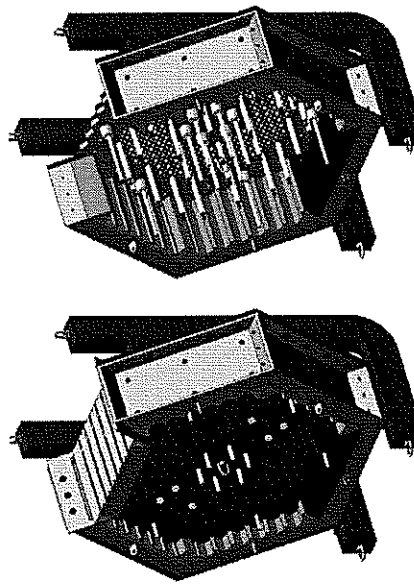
RENDER OF THE CORE MOLD SHOWN IN THE "415265 CORE BLOCK #1-5" CONFIGURATION: FULL ASSEMBLY (LEFT) AND WITH THE FRONT PLATE, TOP AND CAP REMOVED FOR CLARITY (RIGHT).
